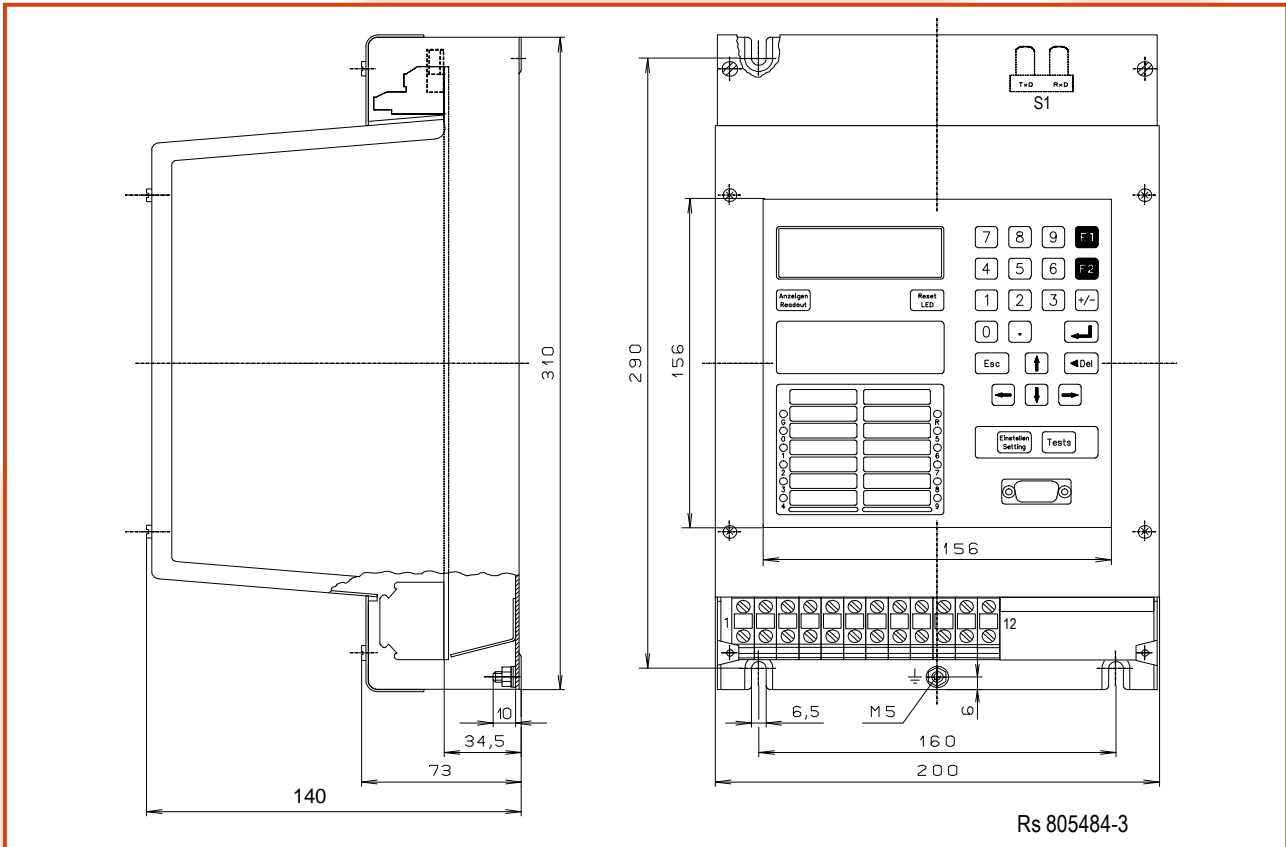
DM 2 housing for panel surface-mounting, lower terminal cover not shown in top view. With the horizontal models the keypad is turned + or -90°.
